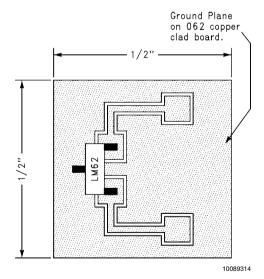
Printed Circuit Board Used for Heat Sink to Generate All Curves. ½ Square Printed Circuit Board with 2 oz. Copper Foil or Similar.
